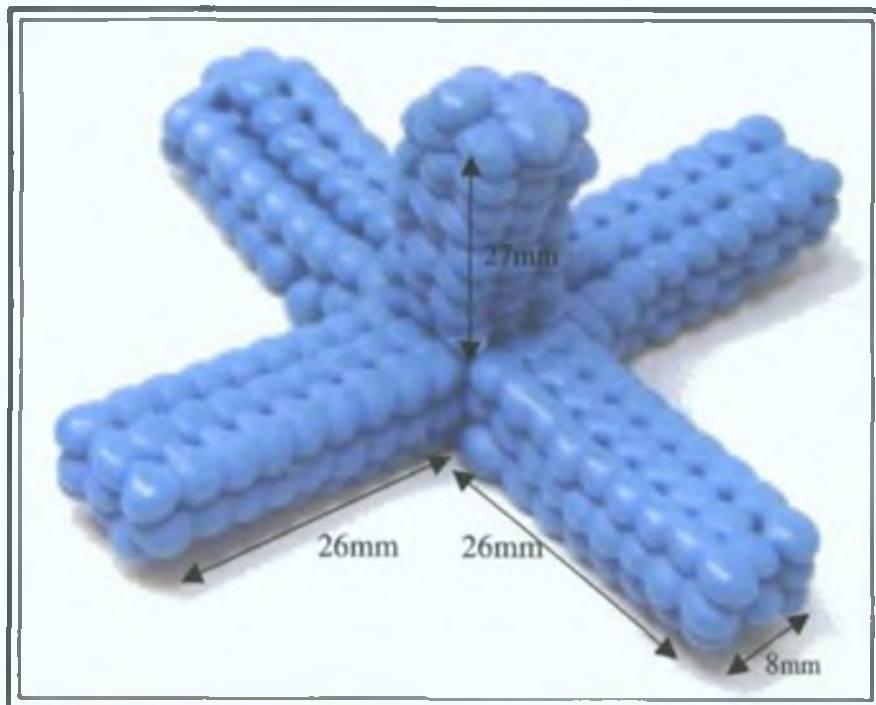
32: Impeller shape produced by using airflow at 83 °C
